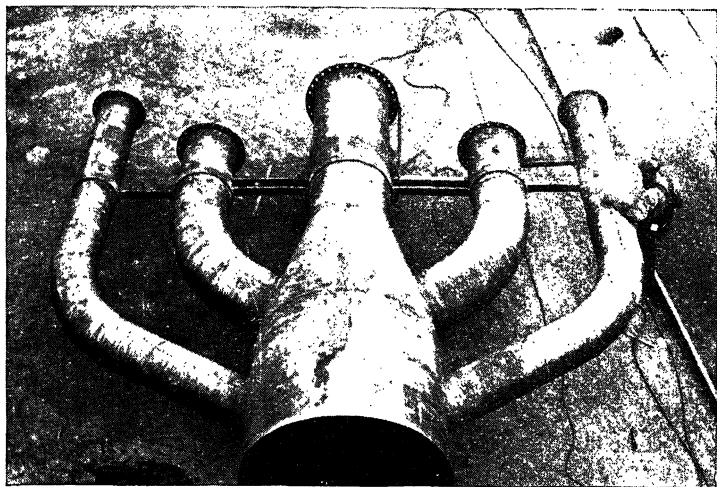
Making up a high-pressure manifold. (*Courtesy of Lincoln Electric Co.*)
